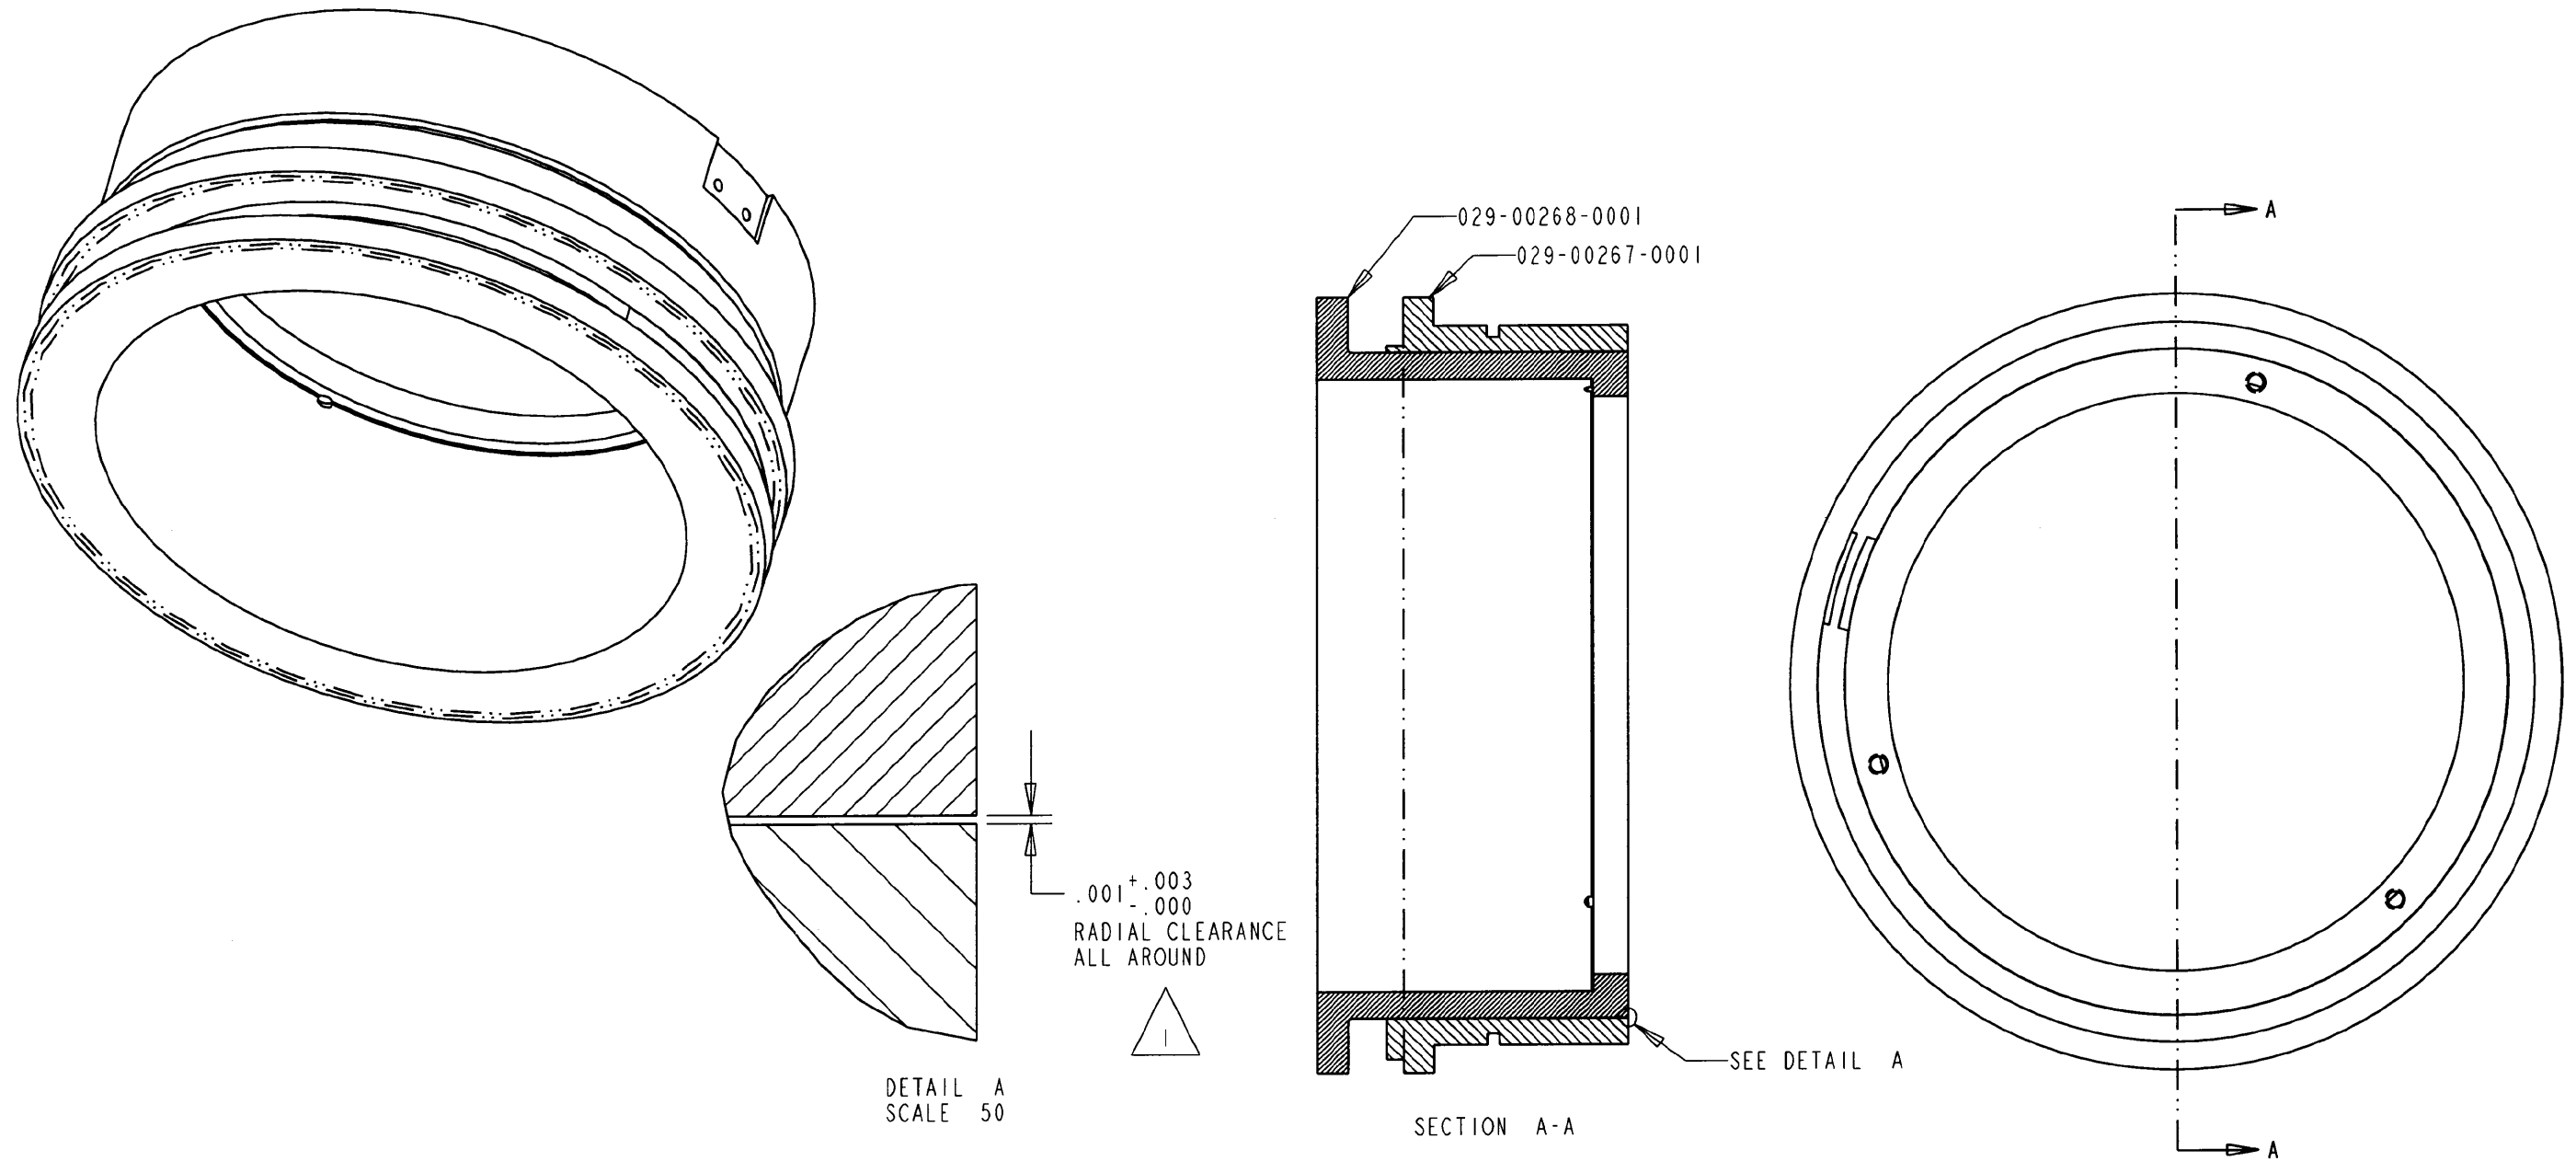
A KI 525 HEADING SELECT GEAR ASSEMBLY
